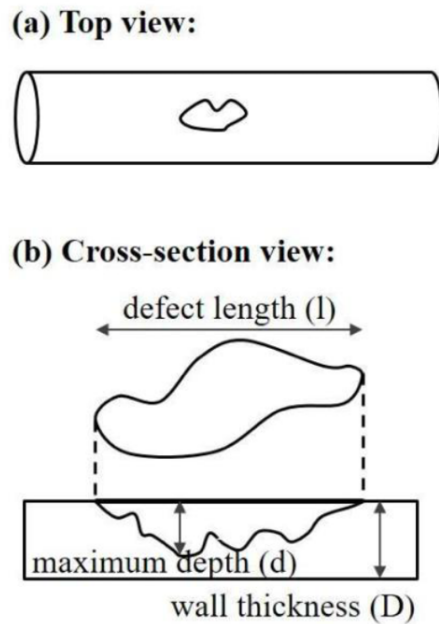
A rectangular-like shaped corrosion defect in the pipeline in (a) Top view and (b) Cross-section view.
